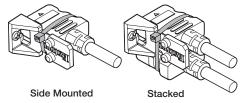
LockIt Cable Lacing Bracket Mounting Options
